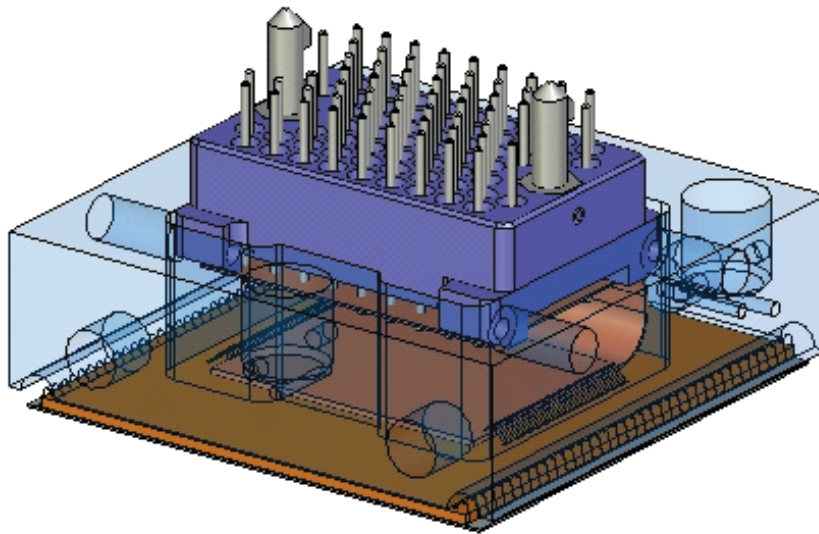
View of the assembled package with the sensitive surface of the CCD on the bottom.
